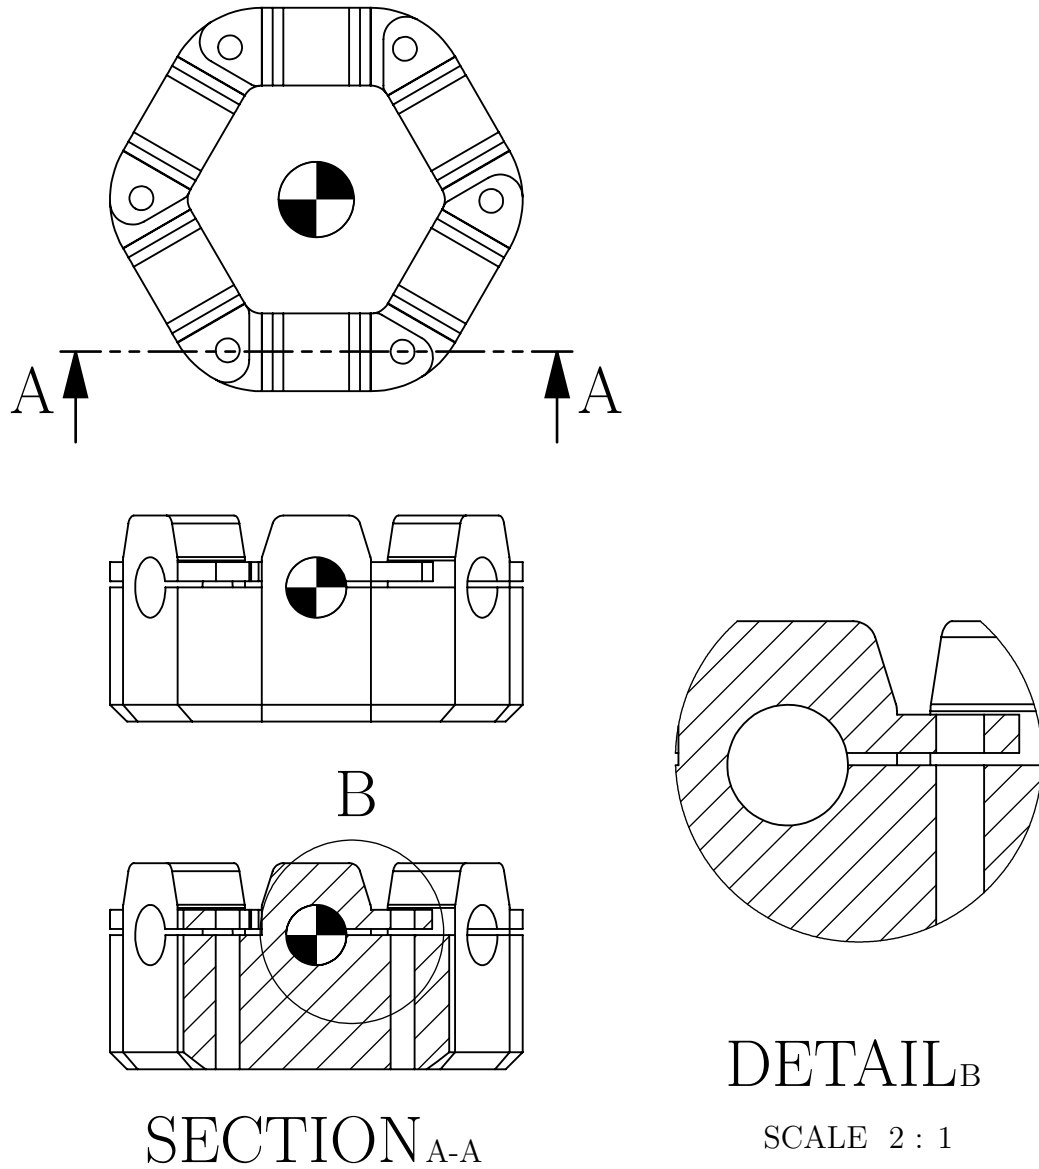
CAD drawing of the variable-pitch rotor hub used with the 3D-printed blades, outlining the mechanism for pitch adjustment.
